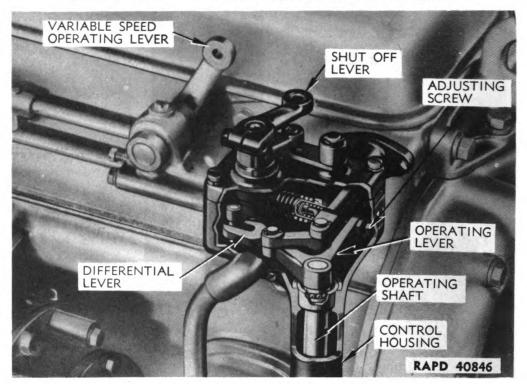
Cut-Away View Showing Governor Control Housing Assembly
